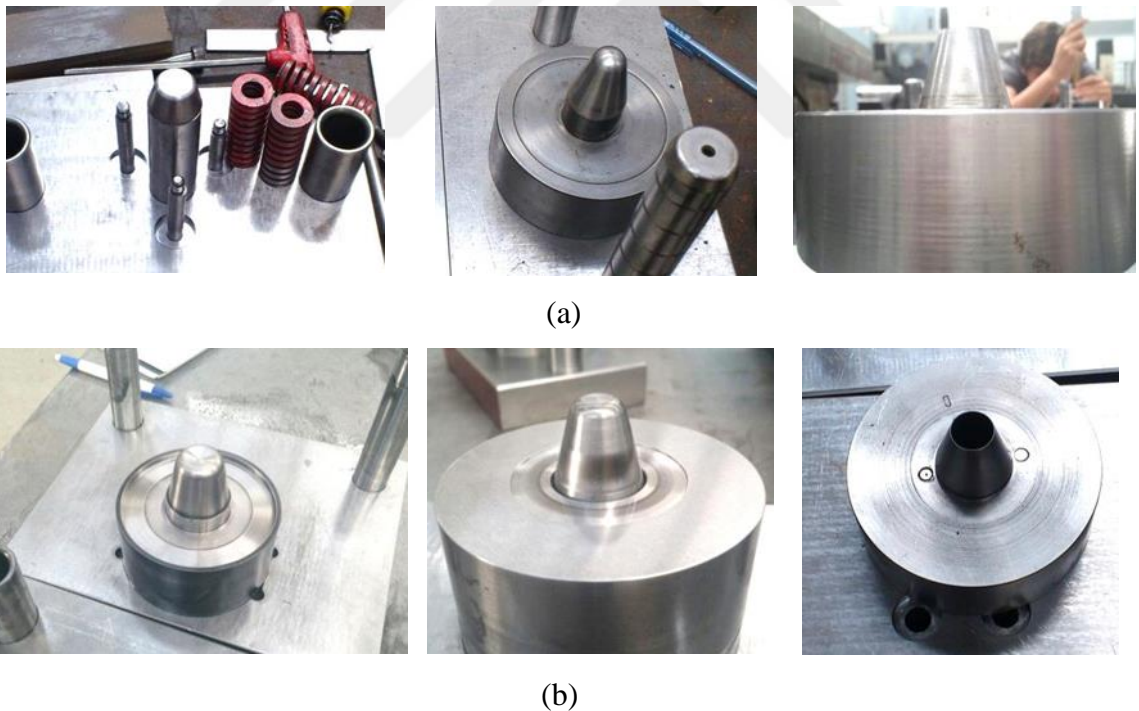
Deep drawing molds; (a) the inner core and (b) the outer shell.
